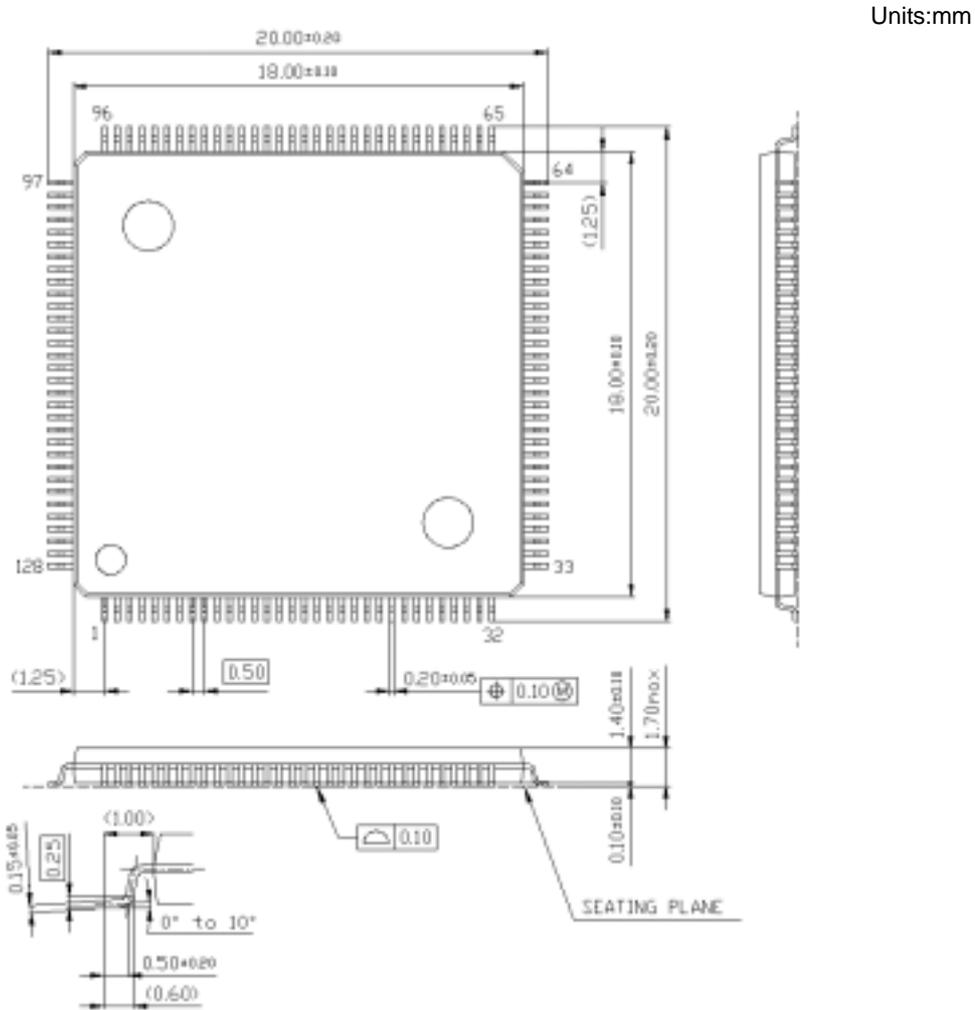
Package Dimension of LQFP128-P-1818F
